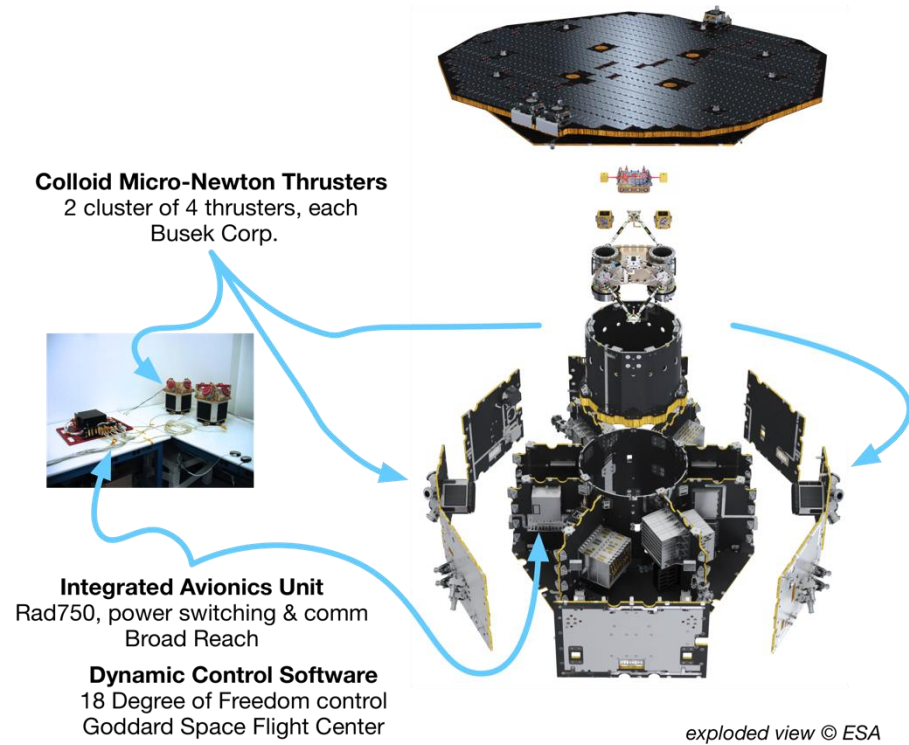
Exploded view of the LISA Pathfinder spacecraft with the ST7 DRS payload.
